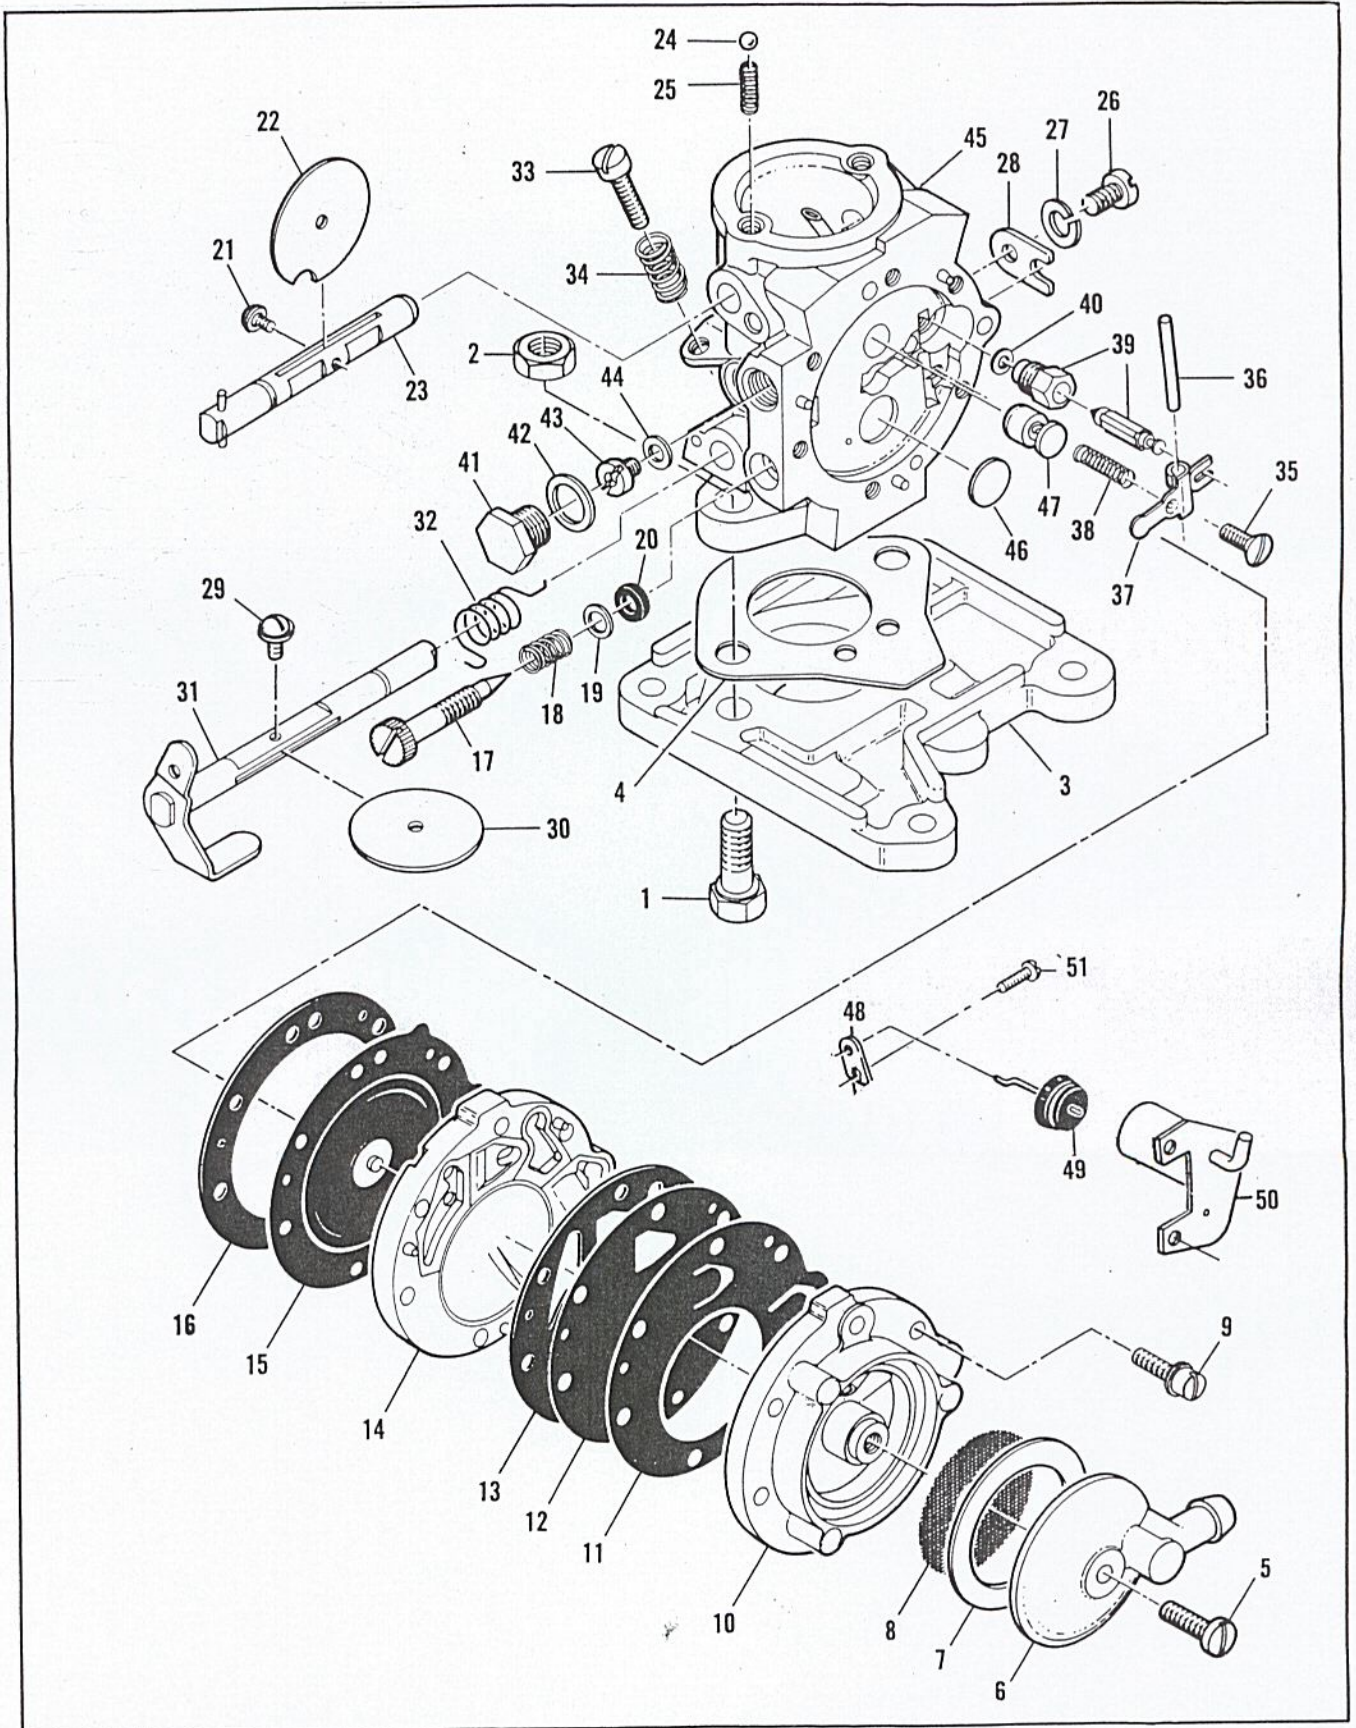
Carburetor, Adapter, and Dash Pot Assemblies.
